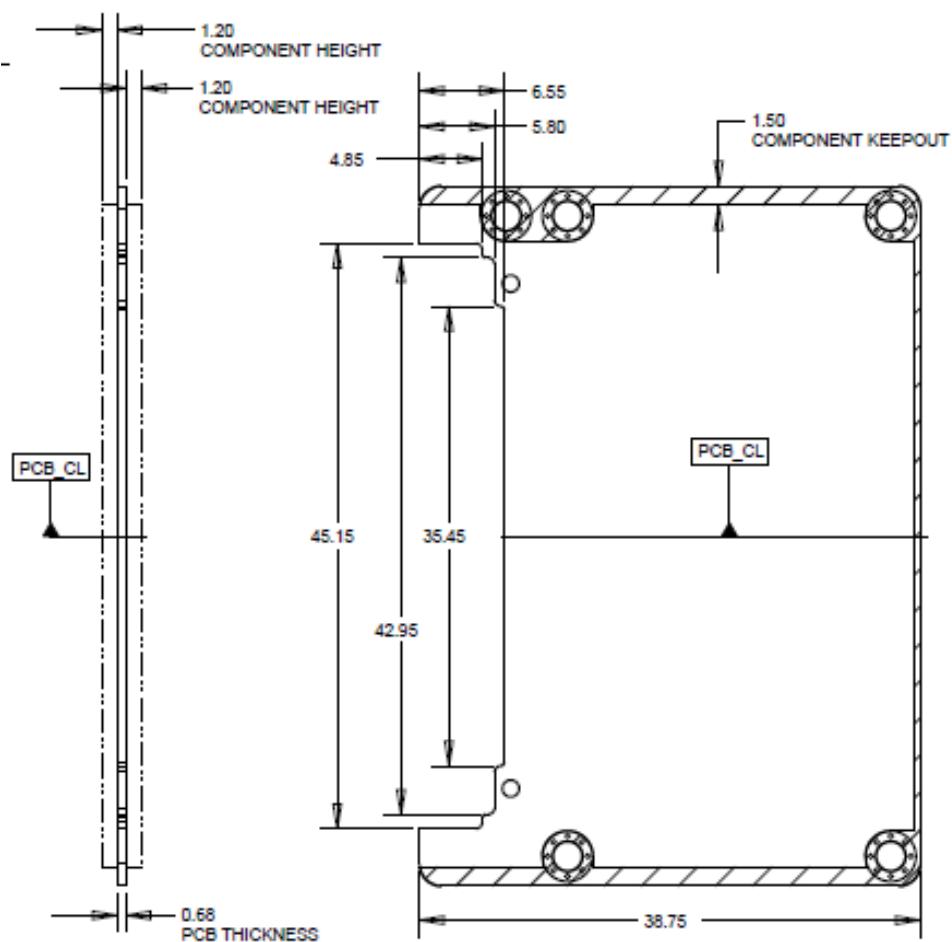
Standard SATA with large screw hole size Bottom View & Side view
